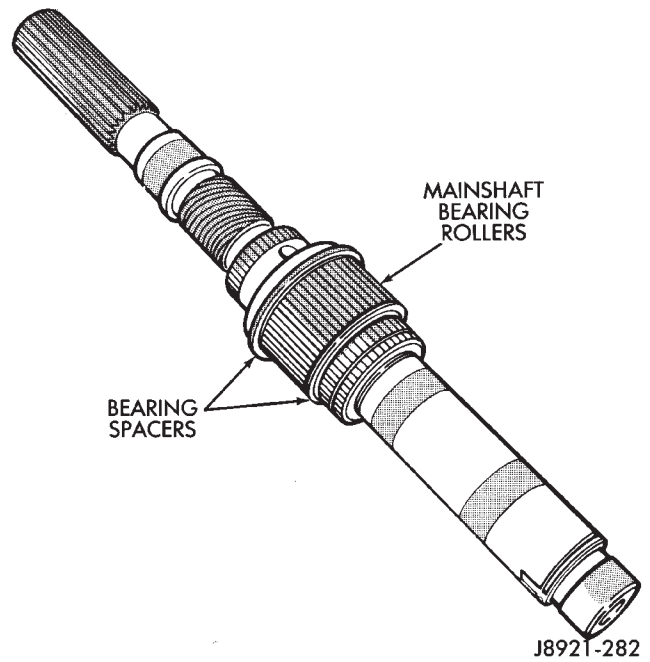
Installing Mainshaft Bearing Rollers and Spacers
